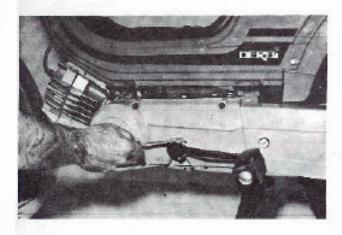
Pedals. Loosen and remove securing nut. Tap lightly to remove tapered pin. Pull off crank arm.
